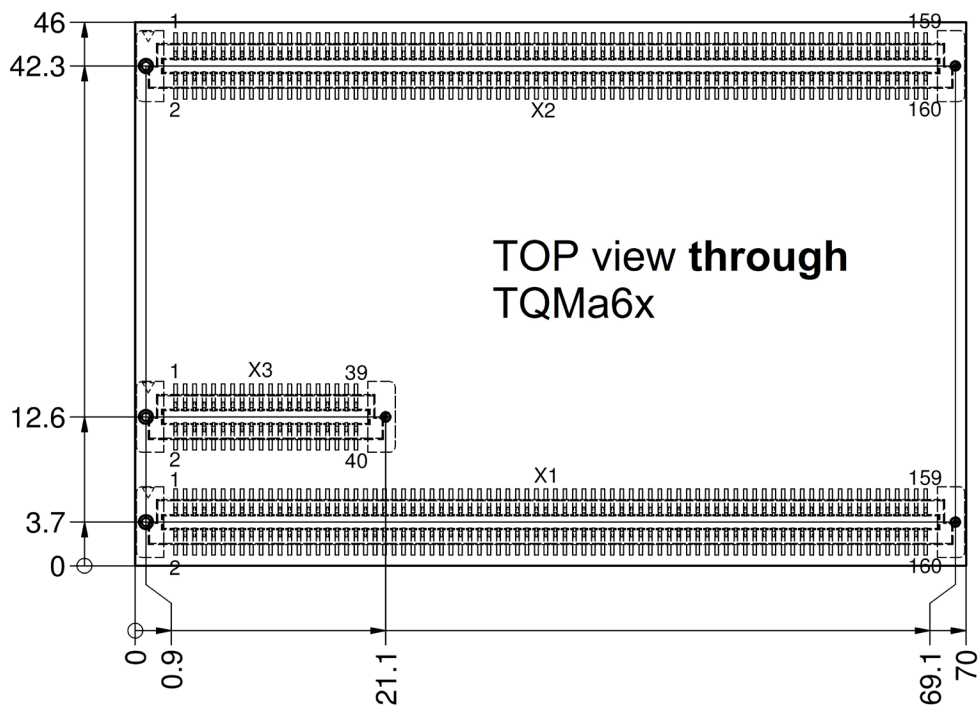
TQMa6x dimensions, top view through TQMa6x
